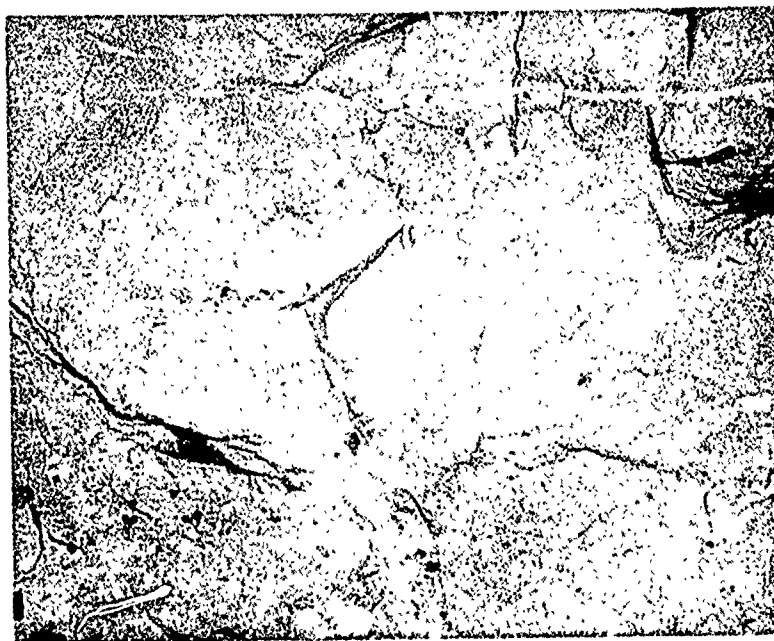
Fracture Appearance Near Mid-origin on Fracture from A-7B-137.
